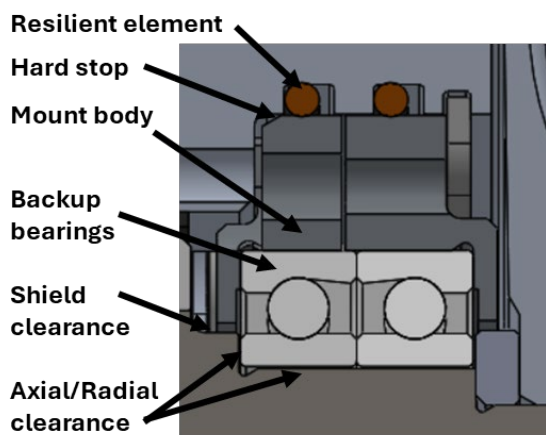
Inlet end (radial/thrust) backup bearing assembly.
